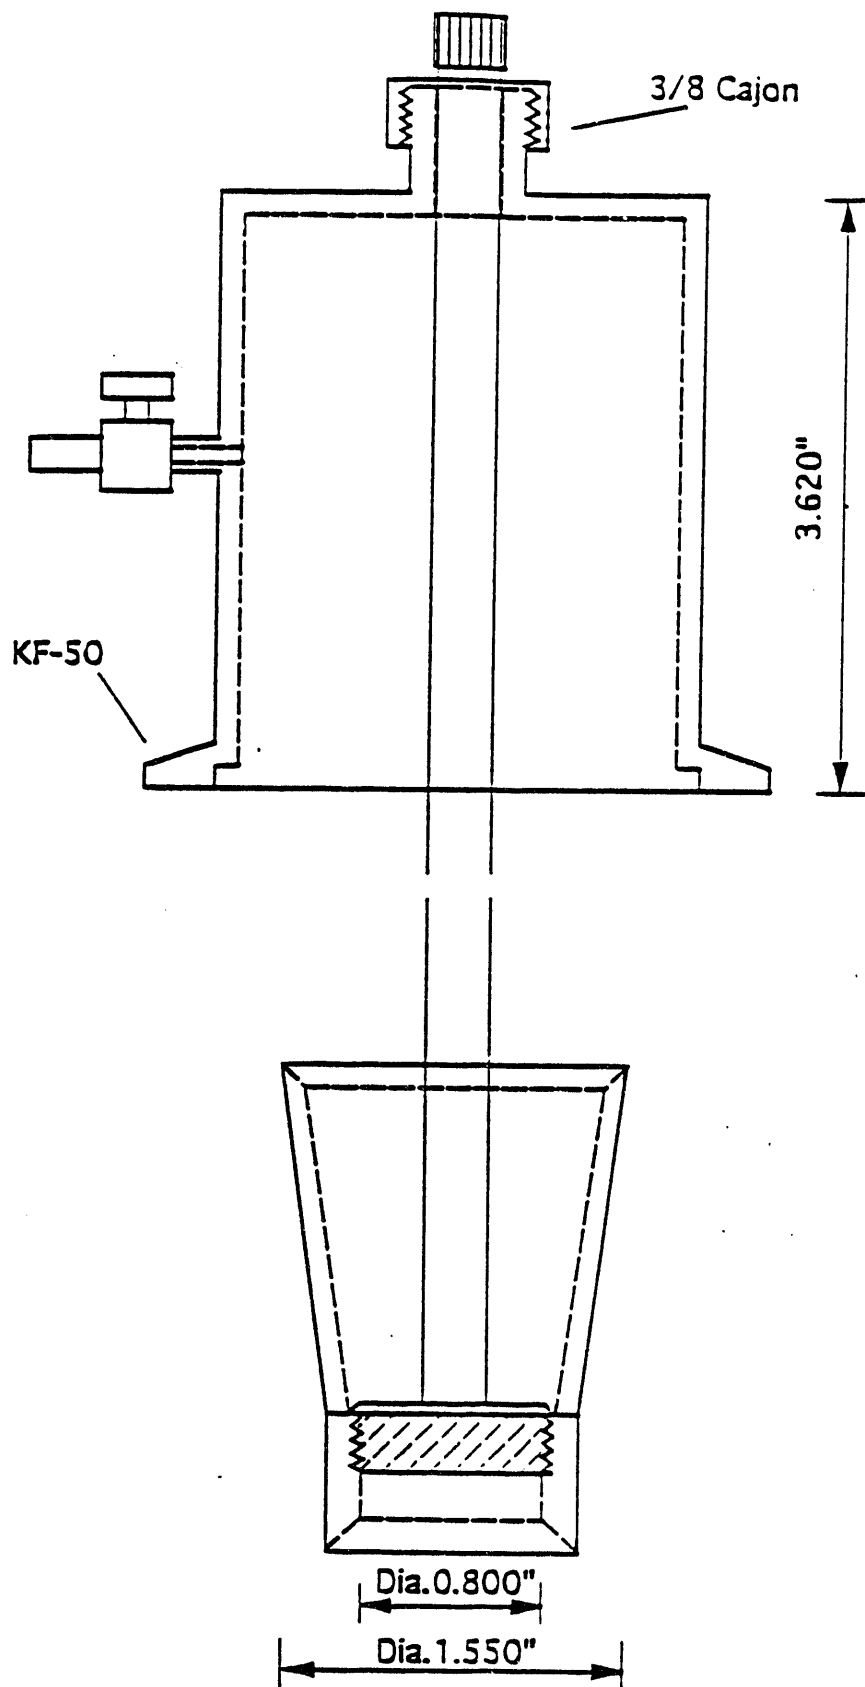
Second guide cone, and insertion screwdriver and vacuum lock. This cone fits in first guide cone (see previous figure) and centers cold-retrieval tube. Dimensions correspond to OMEGA retrieval tube. A similar, but smaller diameter cone is also used for centering dilution-refrigerator retrieval tube.
